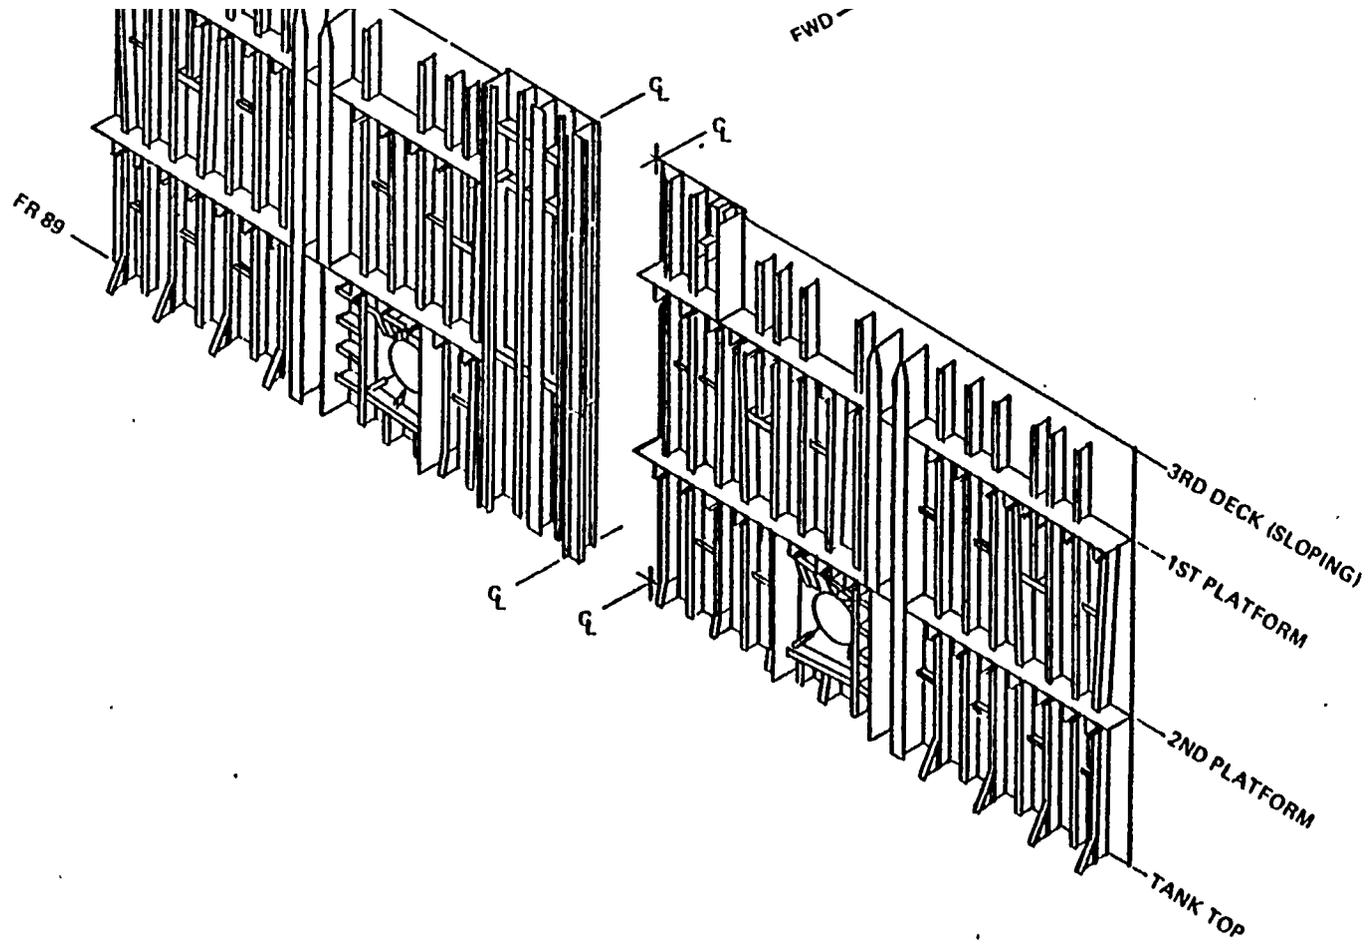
Three Dimensional Projection Showing Relationship of Subassemblies
